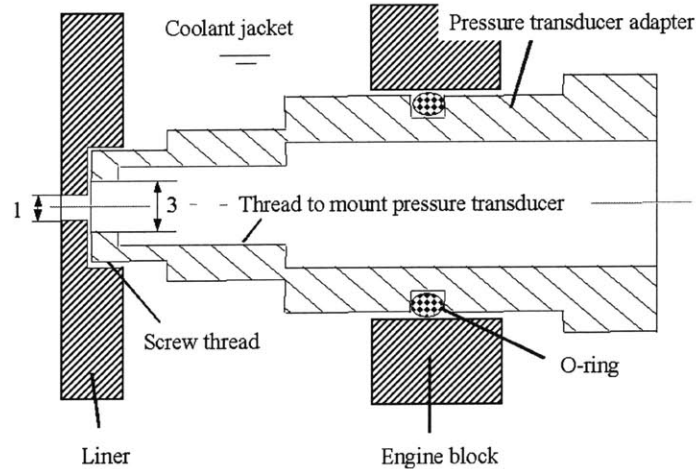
Side view schematic of engine with mounted pressure transducer adapter
